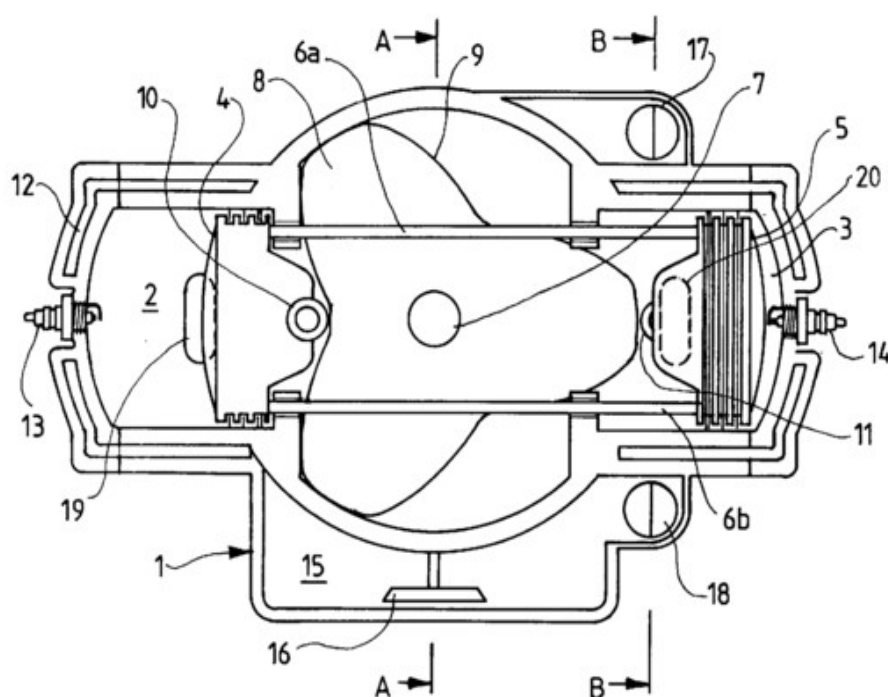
Cross-sectional view of a two-stroke engine comprising a single cylinder module with the cross-section being along the axis of the cylinders and transverse with respect to the engine shaft.
